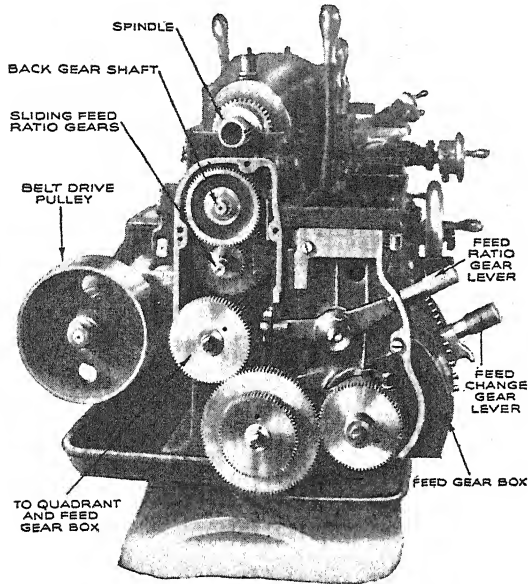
End View of the Pratt and Whitney Geared-Head Lathe with Cover Plates Removed to Show the Feed Ratio and Change Gears.
